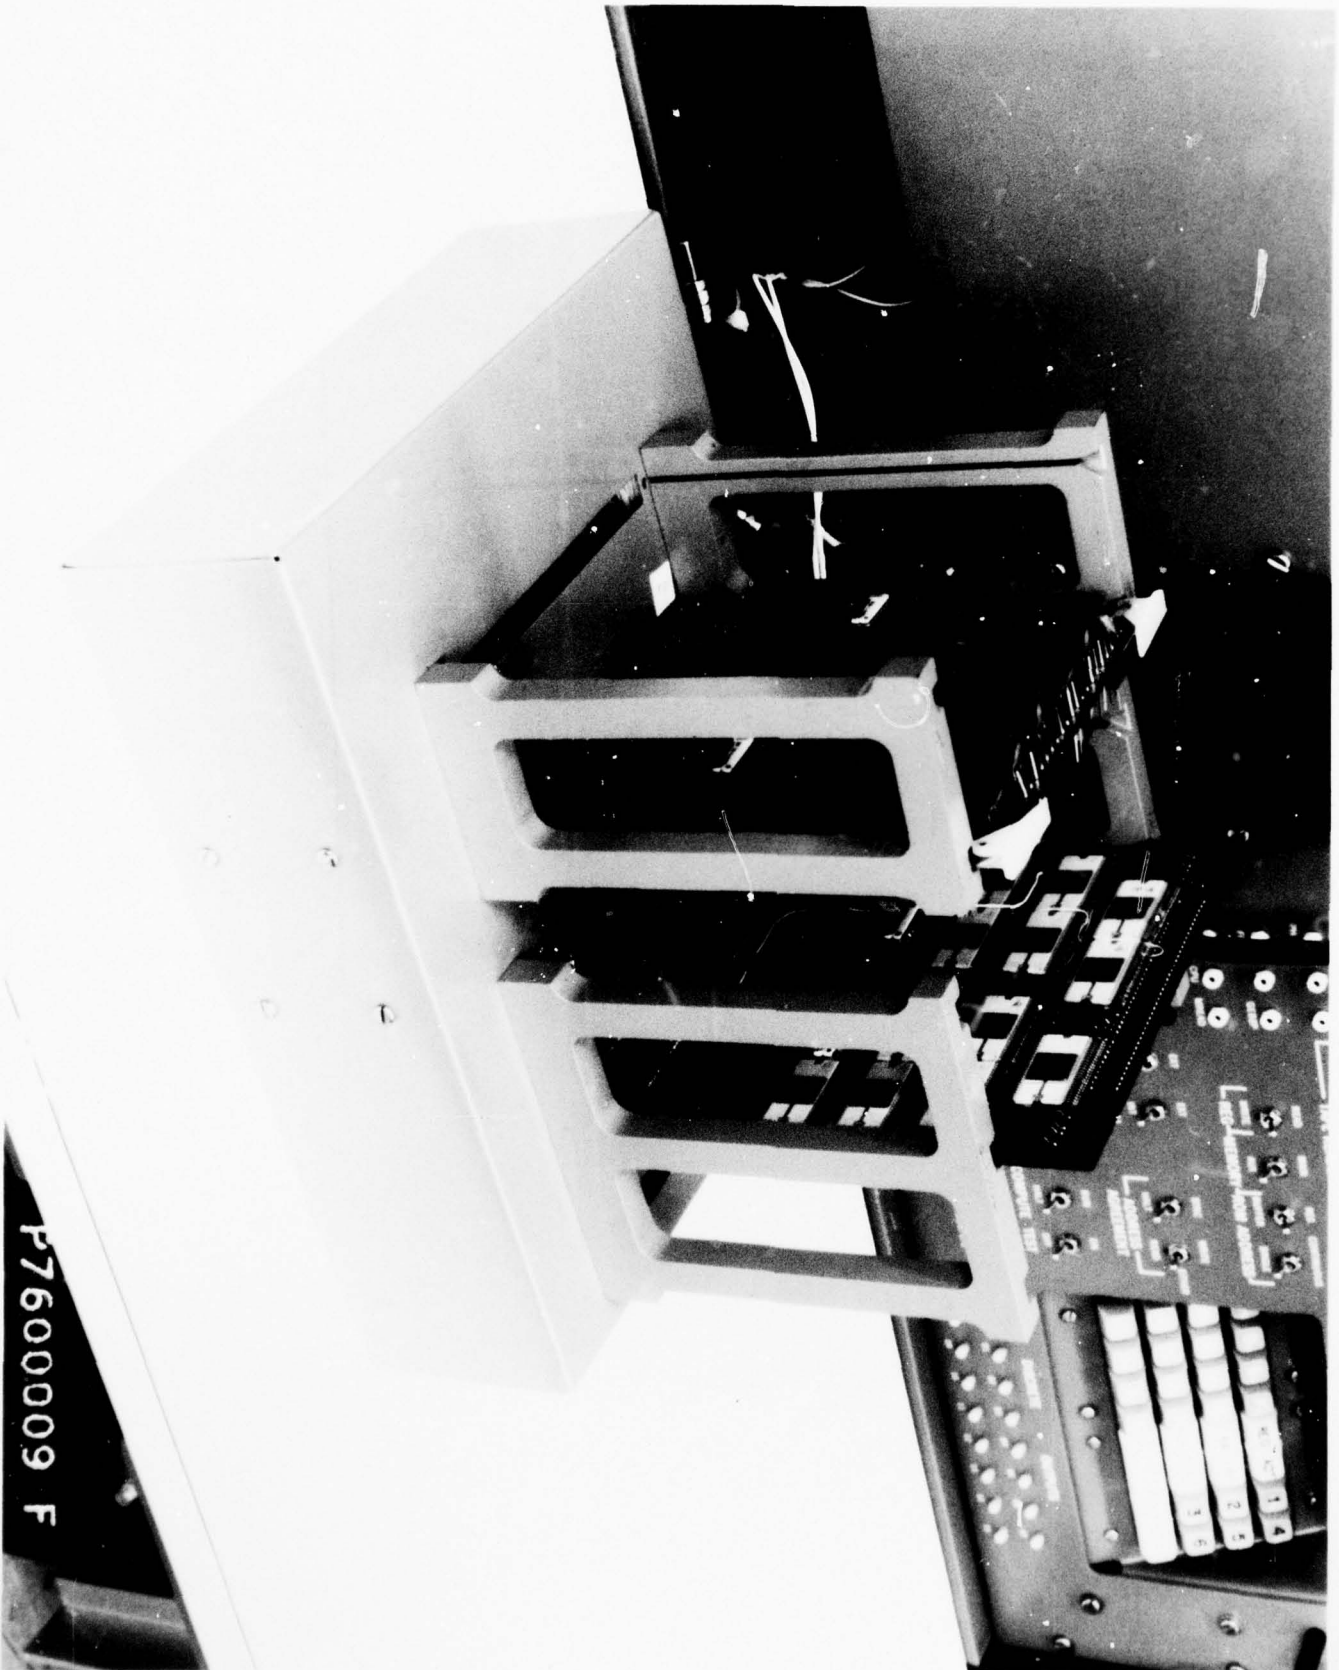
DPU System Test Fixture with DPU and Interface Boards
